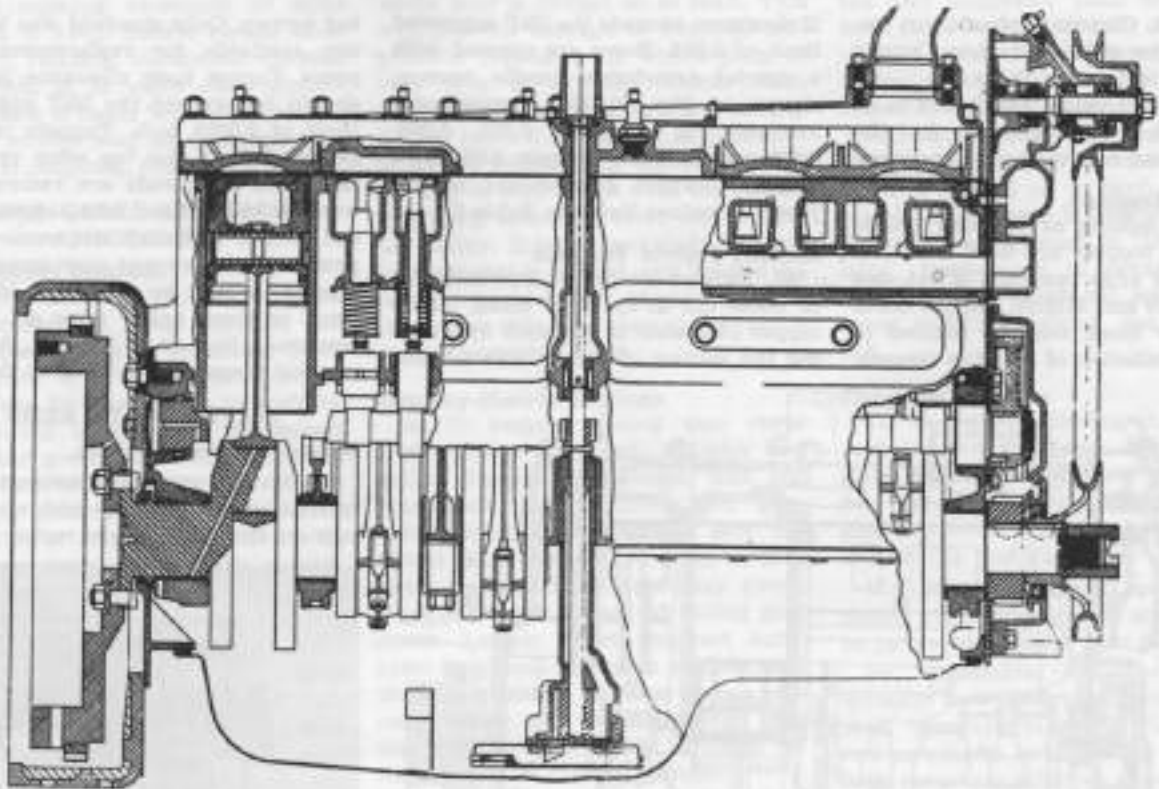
Continental M250-M330 six cylinder engine cross section. These models have a 7 bearing crankshaft.
